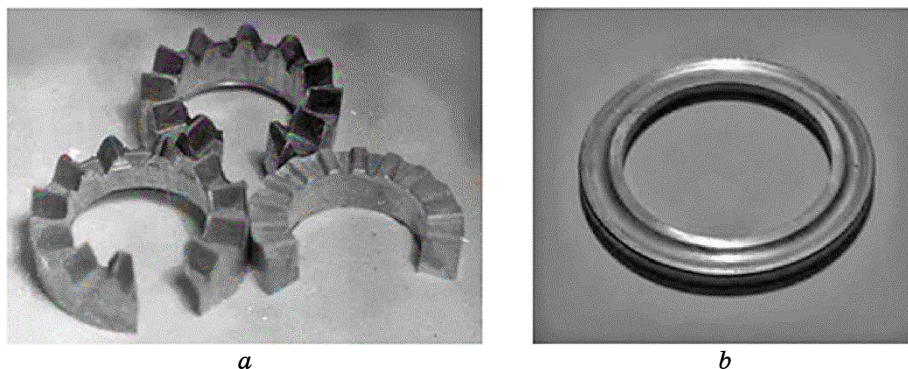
Workpieces obtained by OF method: cam half-couplings at different stages of rolling (*a*), thrust bearing ring (*b*).
